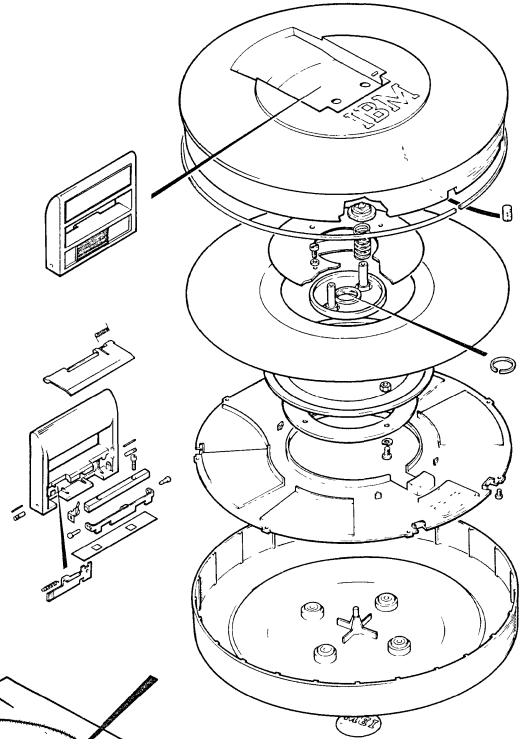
5440 CARTRIDGE ASSEMBLY
